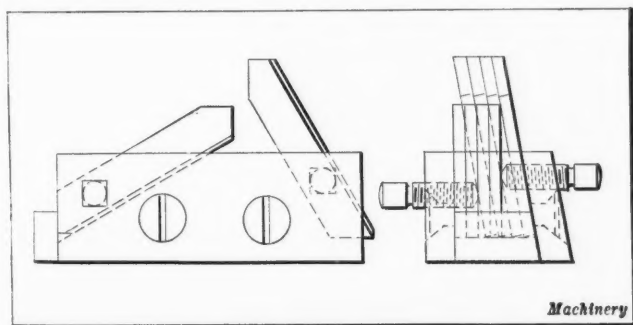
Fixture used in sharpening Hollow-mill Blades on a Surface Grinder
